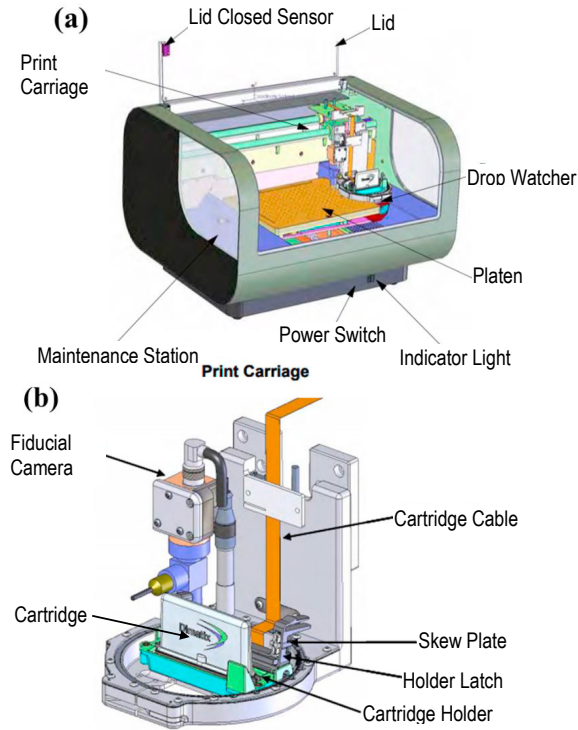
(a) Dimatix-2850 inkjet printer; (b) printer cartridge assembly [33].
